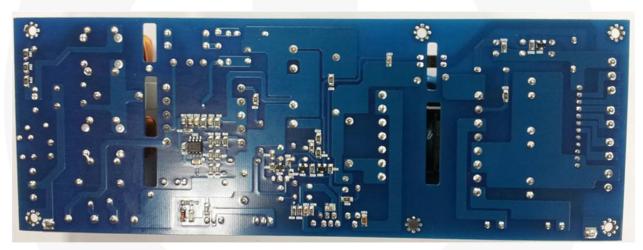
Bottom Views (Dimensions:225 mm (L) x 80 mm (W) x 43 mm (H))
